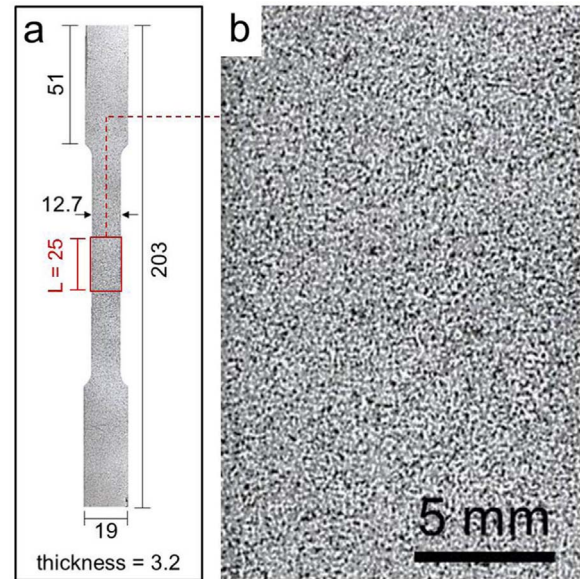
(a) Tensile specimen geometry with a magnified view of the area of interest shown in (b). All dimensions in mm.
